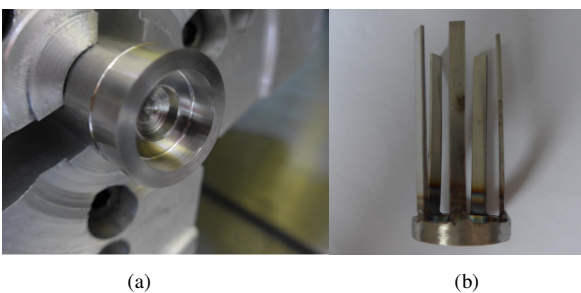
Fuel rod stopper: (a) machining on lathe, (b) final part after welding.
